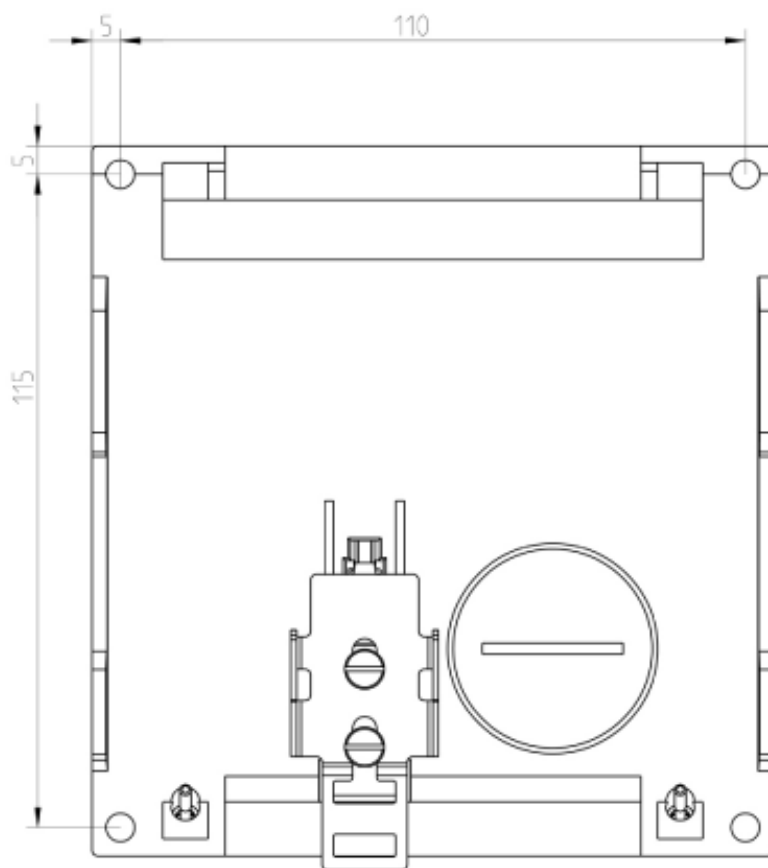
Medium design dimension drawing (IE Switch X-300)
